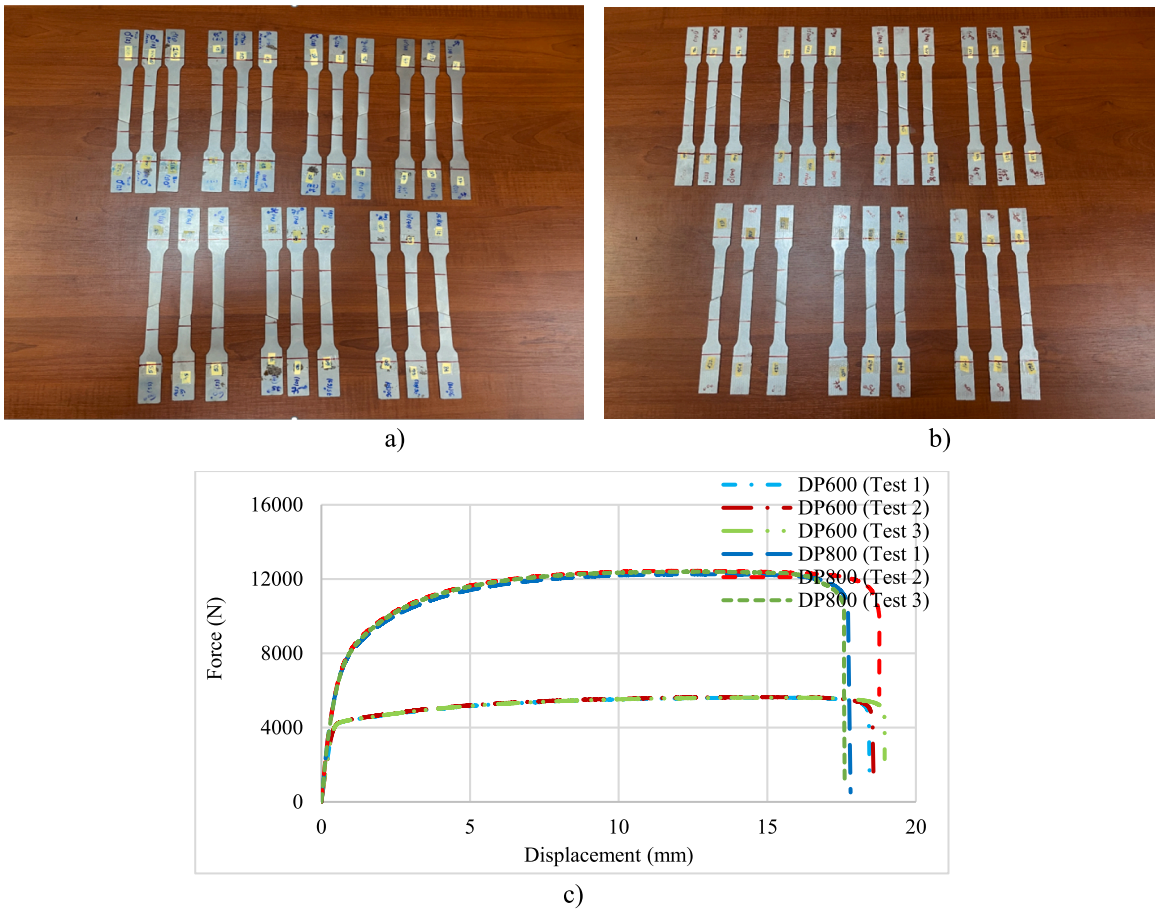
Fractured standard tensile test specimens: a) DP600, b) DP800, c) force–displacement curves of both steels standard uniaxial tensile tests in rolling direction.
